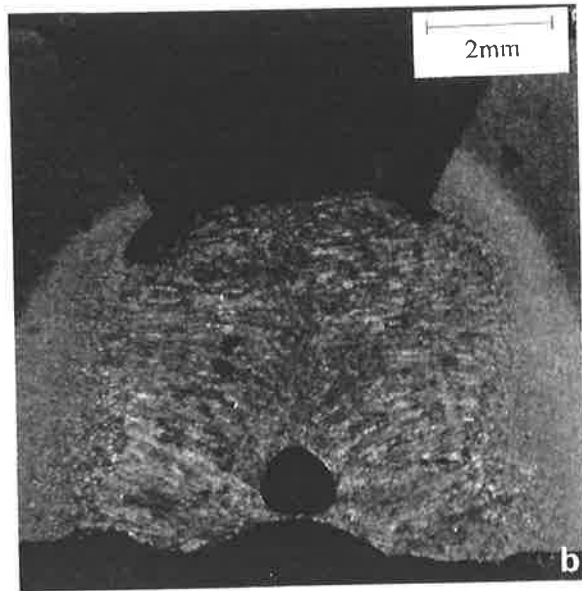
Macrograph showing the typical appearance of hollow bead in the reinforcement part of the weld bead. Welding conditions: weld travel speed 515mm/min, welding current 190A, welding voltage 25V. Root gap 1.4mm and root face 2.5mm.
